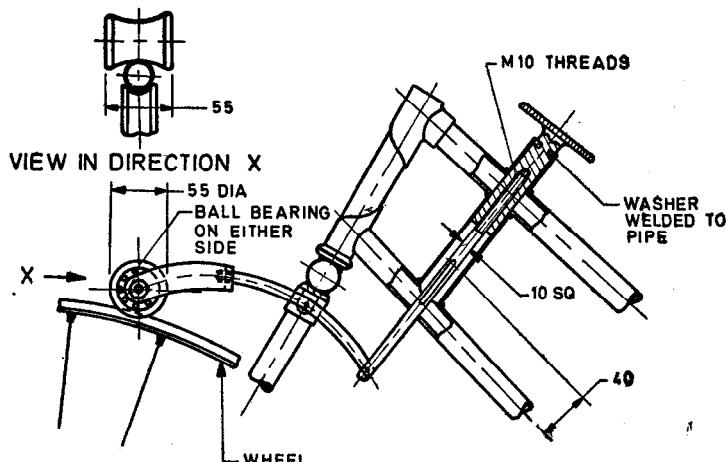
DETAILS OF BRAKING ARRANGEMENT
